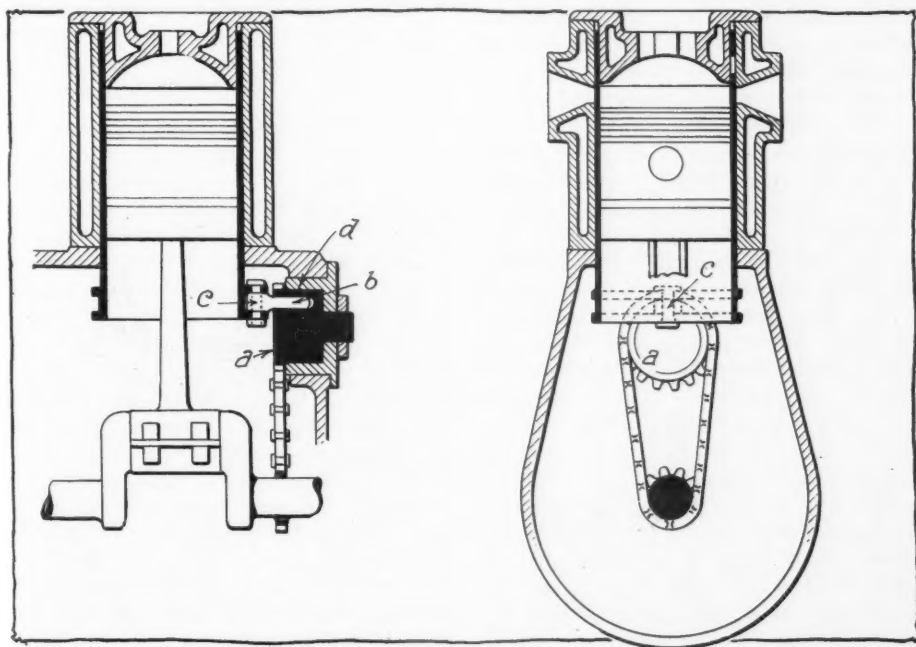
COMBINED OSCILLATING AND SLIDING SLEEVE VALVE
